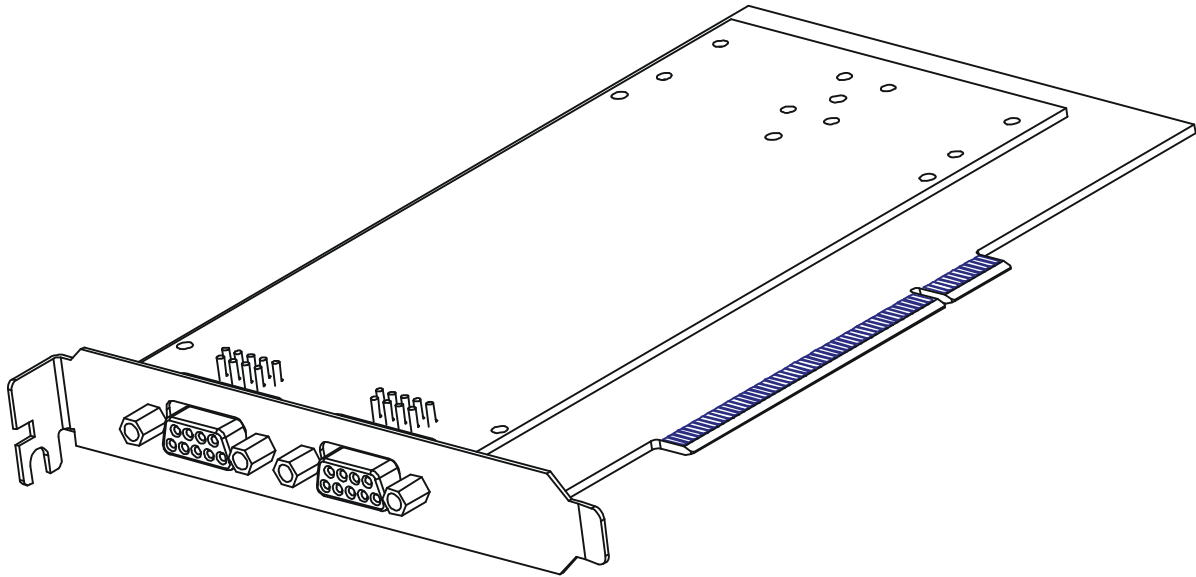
Dual port PMC mezzanine card on a PCI card assembly
